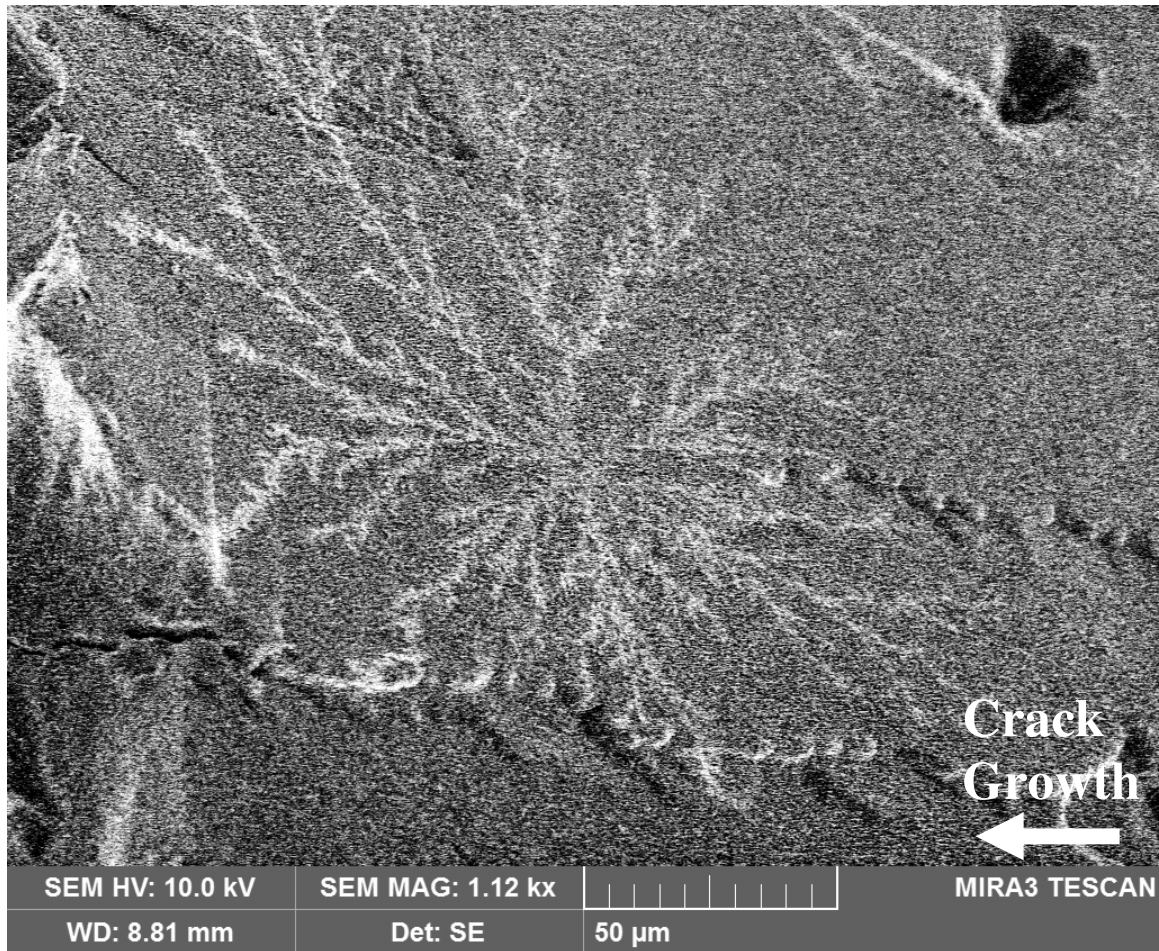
PWA1484 Fracture Surface Displaying Flat Fracture with Snowflake Pattern Possibly Formed During Casting at 1 Hz, 649°C and R=0.7
